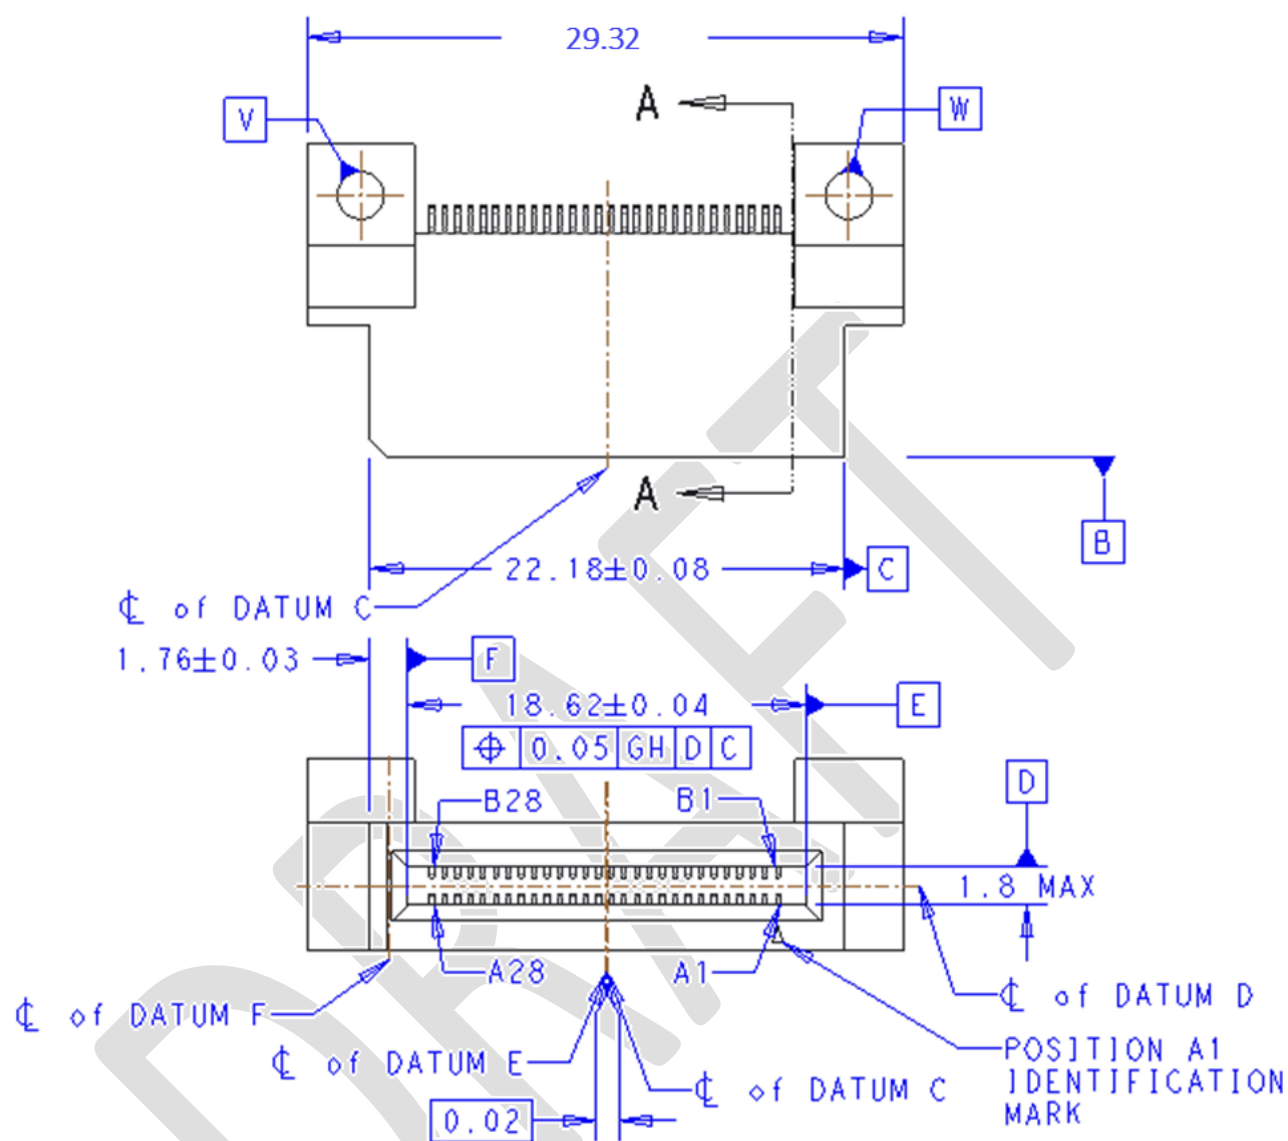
1C STRADDLE MOUNT CONNECTOR DIMENSIONS – FRONT VIEW (MM)
